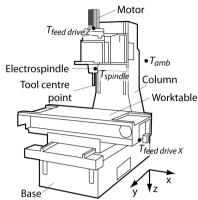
Three axis machine tool schema and relevant temperature probes placement
